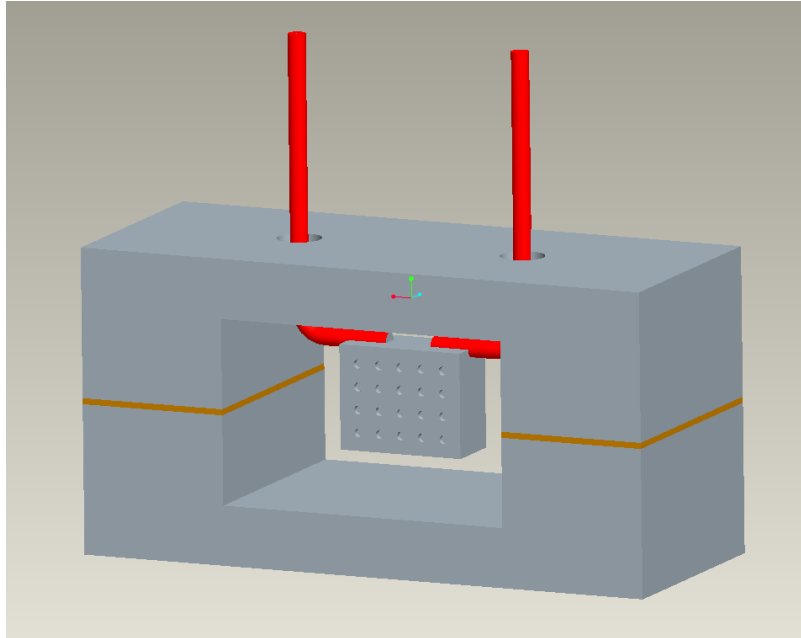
A CAD drawing of the acoustic test package assembly before molding.
